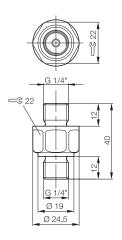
Dimensioned drawing of flush-mounted pressure sensors, 100 bar or higher
